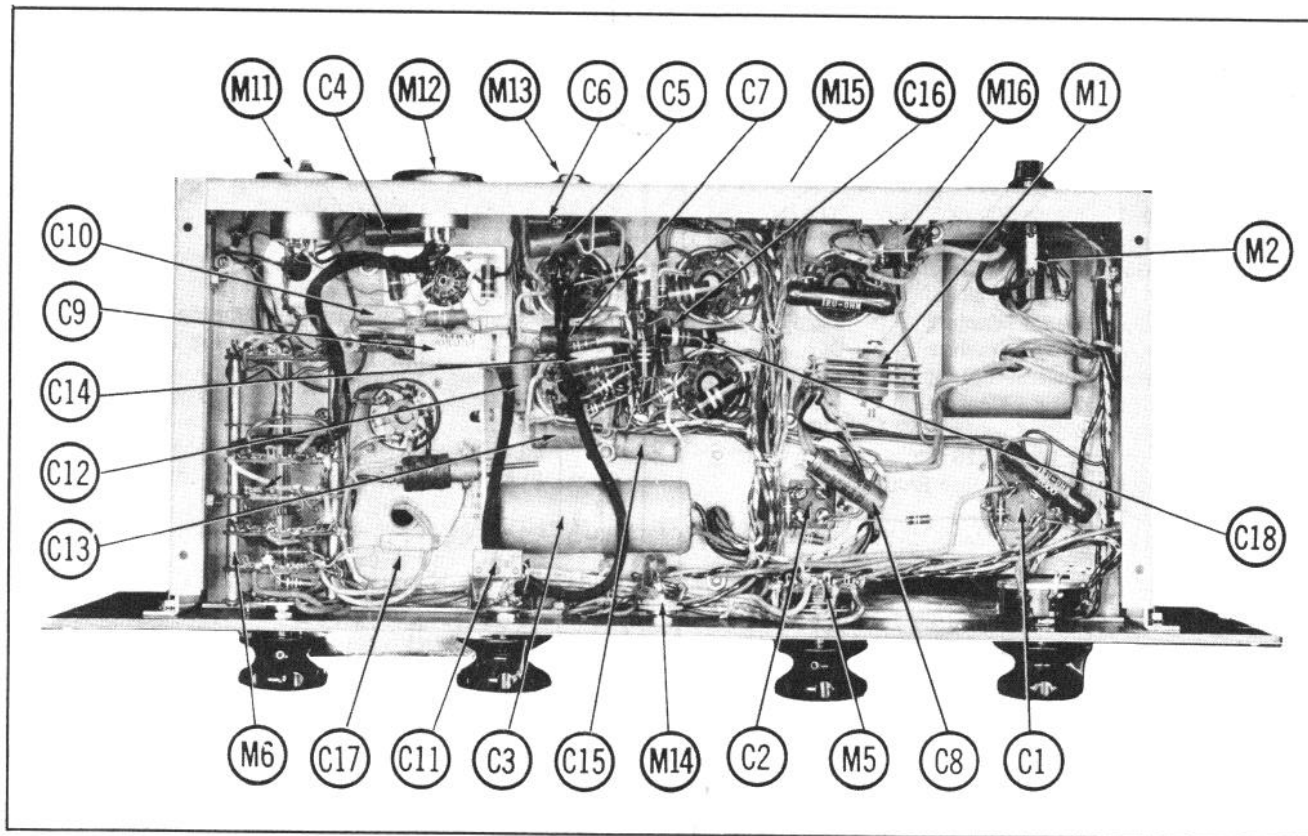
Bottom View of PT6-6J Amplifier Chassis.
